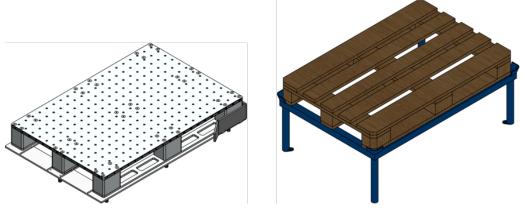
Metal pallet (left) and wooden pallet on pallet support (right)
